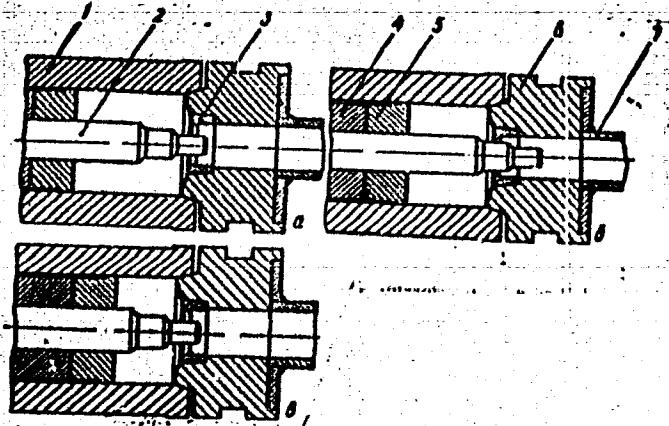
Device for pressing drill pipes with two internal thickenings.
